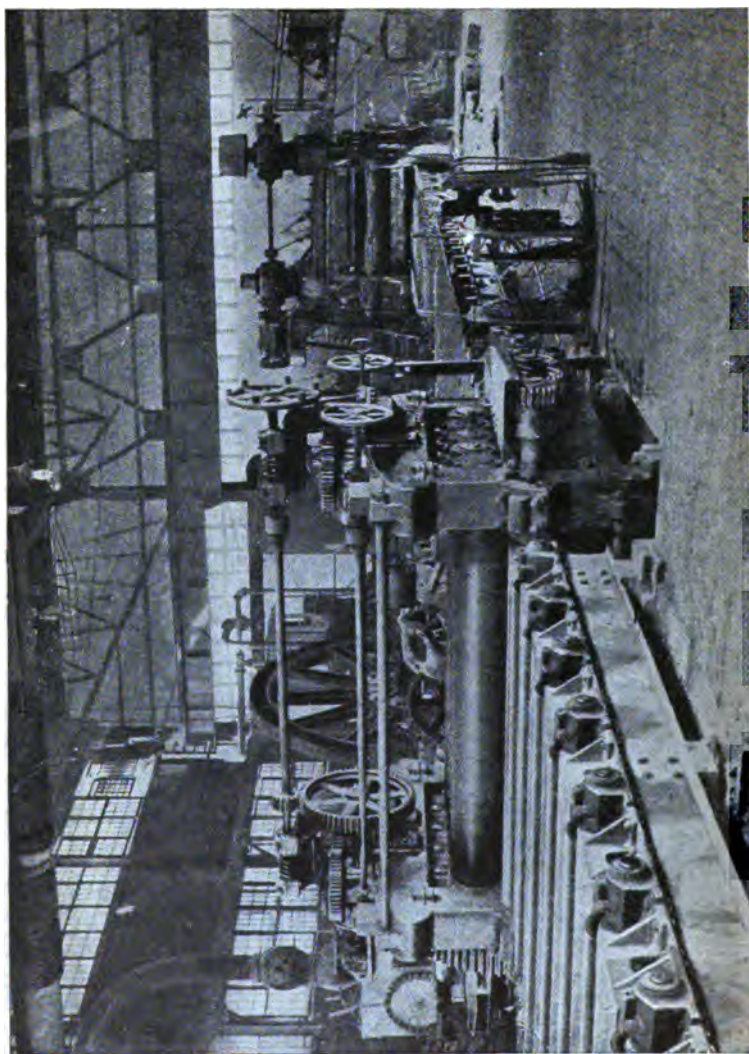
Sec. 10pp.—100-inch plate straightening machine and 84-inch plate mill.
